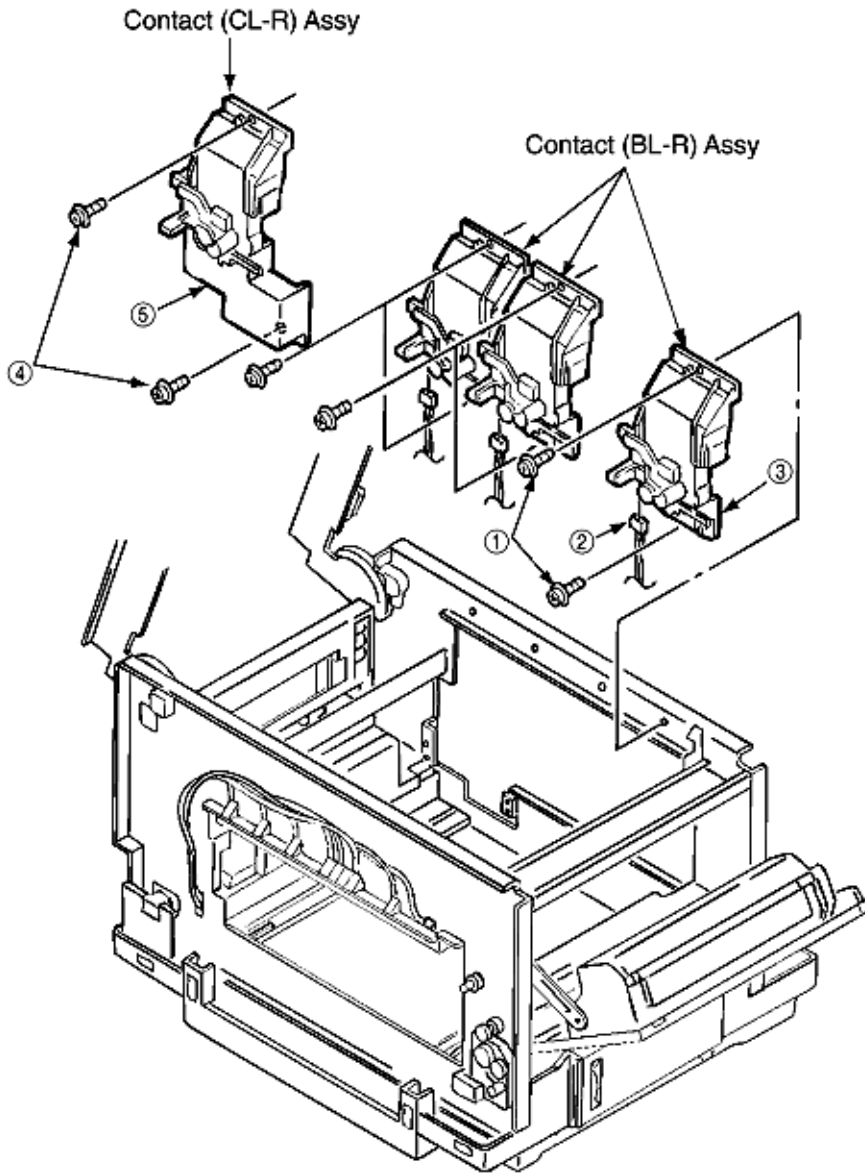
Contact Bracket (BL-R) Assy, Contact Bracket (CL-R) Assy
